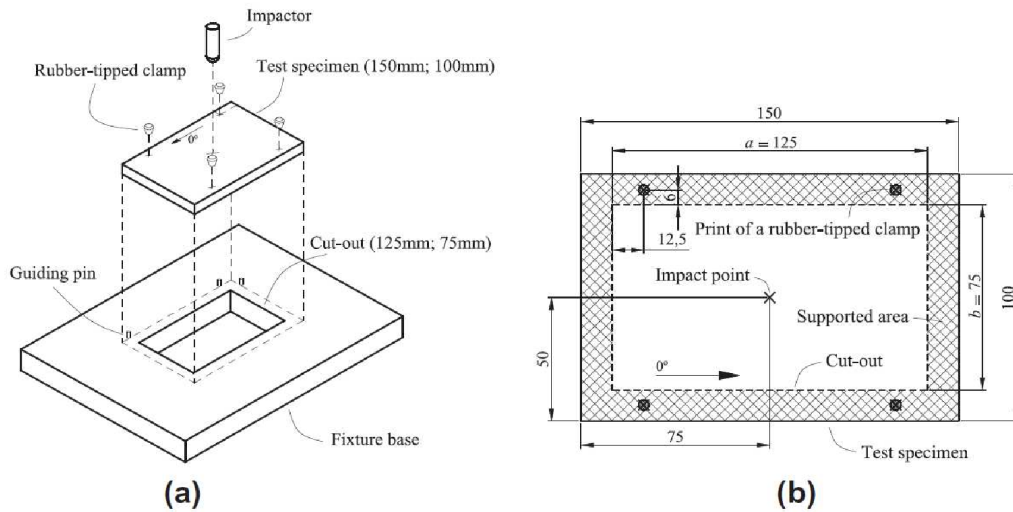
Geometric definition of the LVI test configuration. (a) Impact support fixture. (b) Detail of the support area and clamping points of the specimen.
